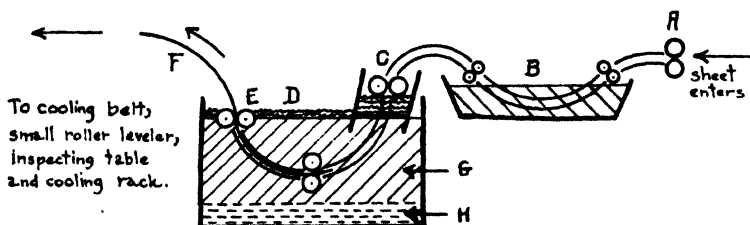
Galvanizing pot (skeleton diagram—section).
